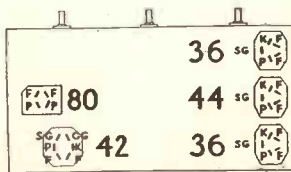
VALVE SOCKETS, UNDERSIDE OF CHASSIS.
